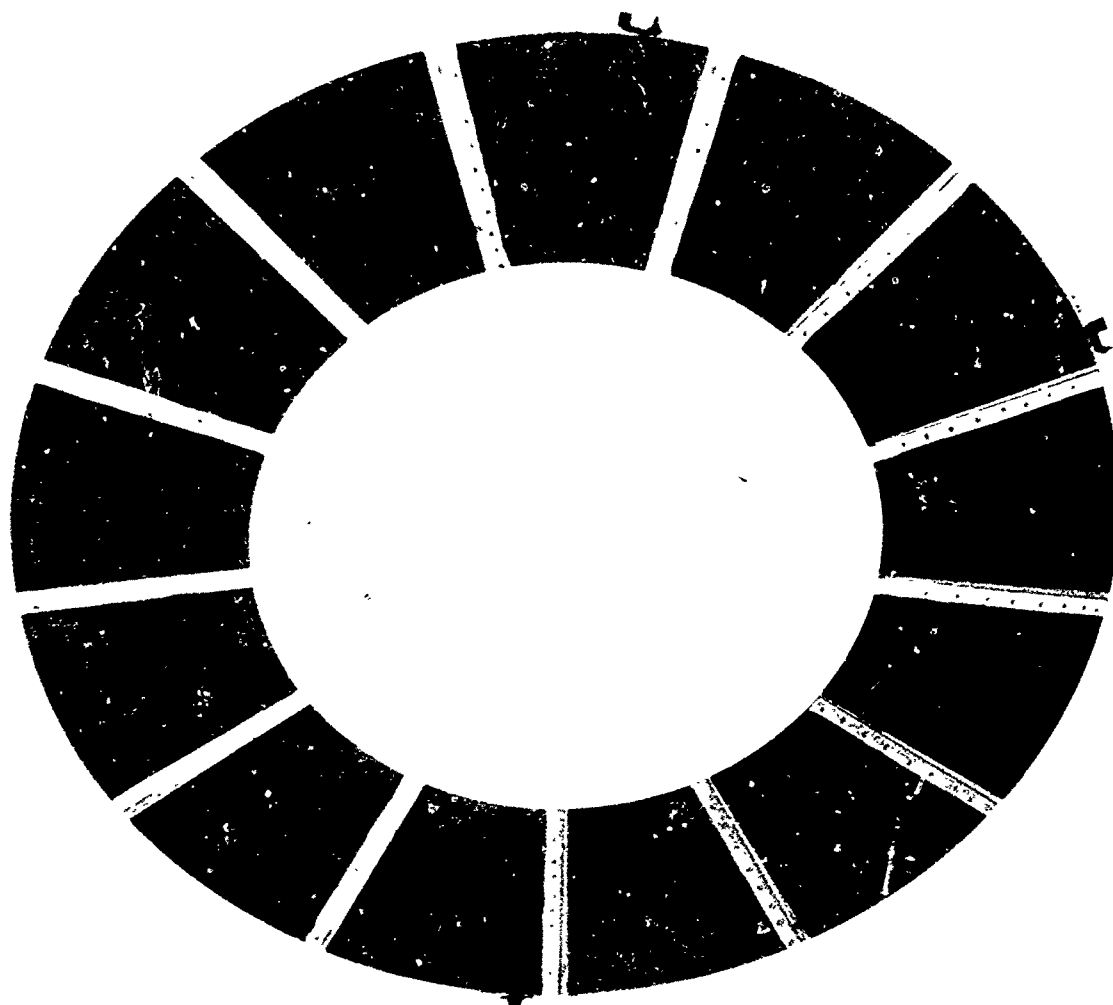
Bearing Assembly With Repositioned Locating Slots.
